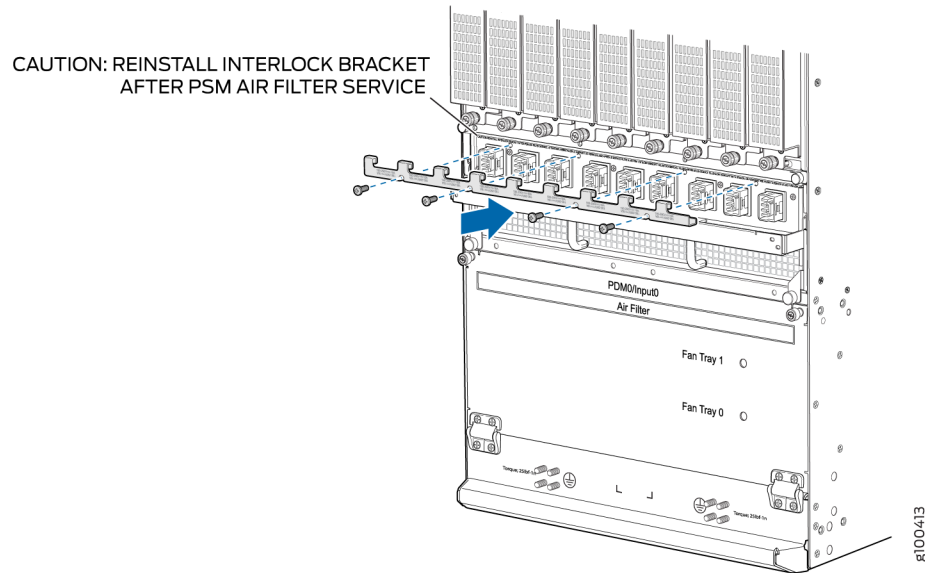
Removing the PSM (for the Universal HVAC/HVDC) Air Filter from the Chassis
